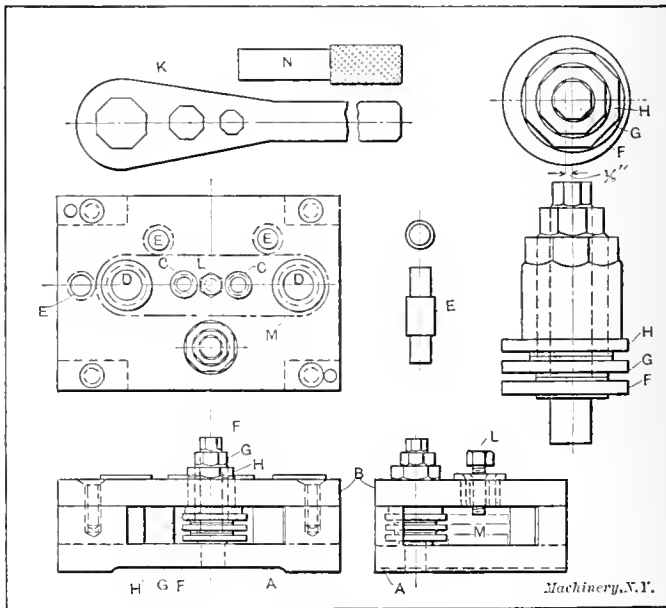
Jig equipped with Unique Type of Eccentric Clamping Device
